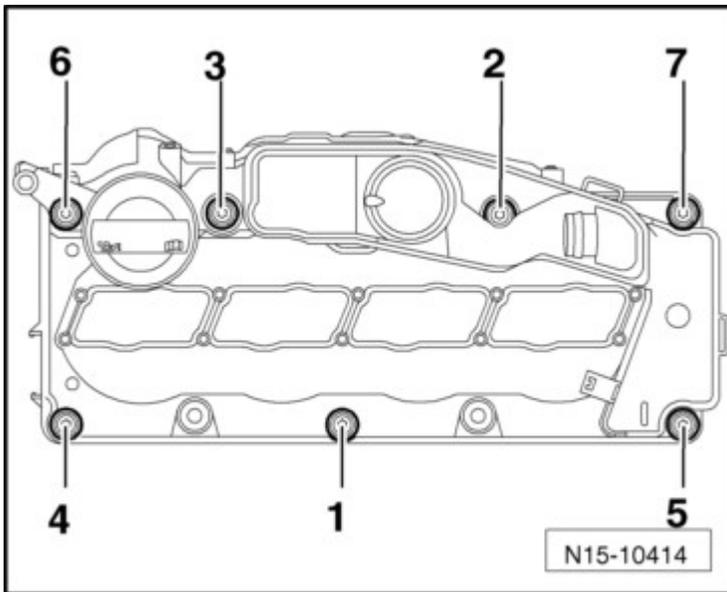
Identifying Head Cover Bolts -1 Through 7- Tightening Sequence
